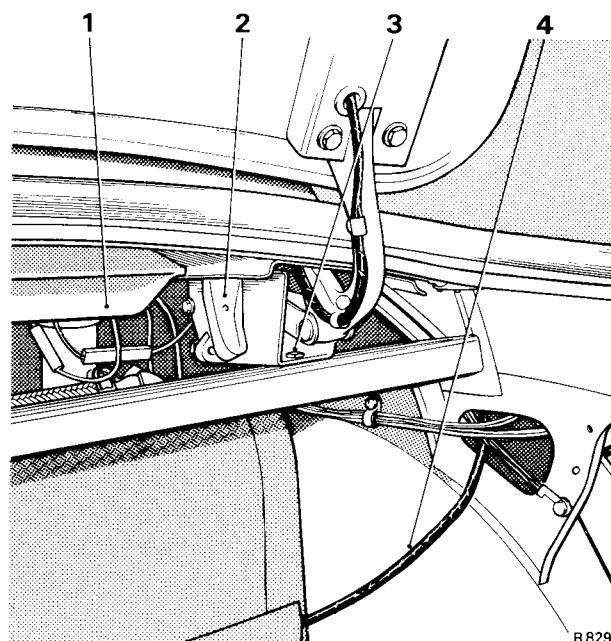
LUGGAGE COMPARTMENT LID HINGE ASSEMBLY
